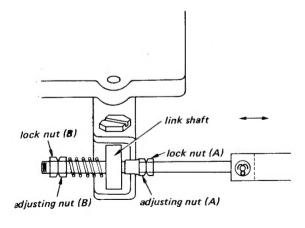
Pinch roller pressure adjustment (1)
